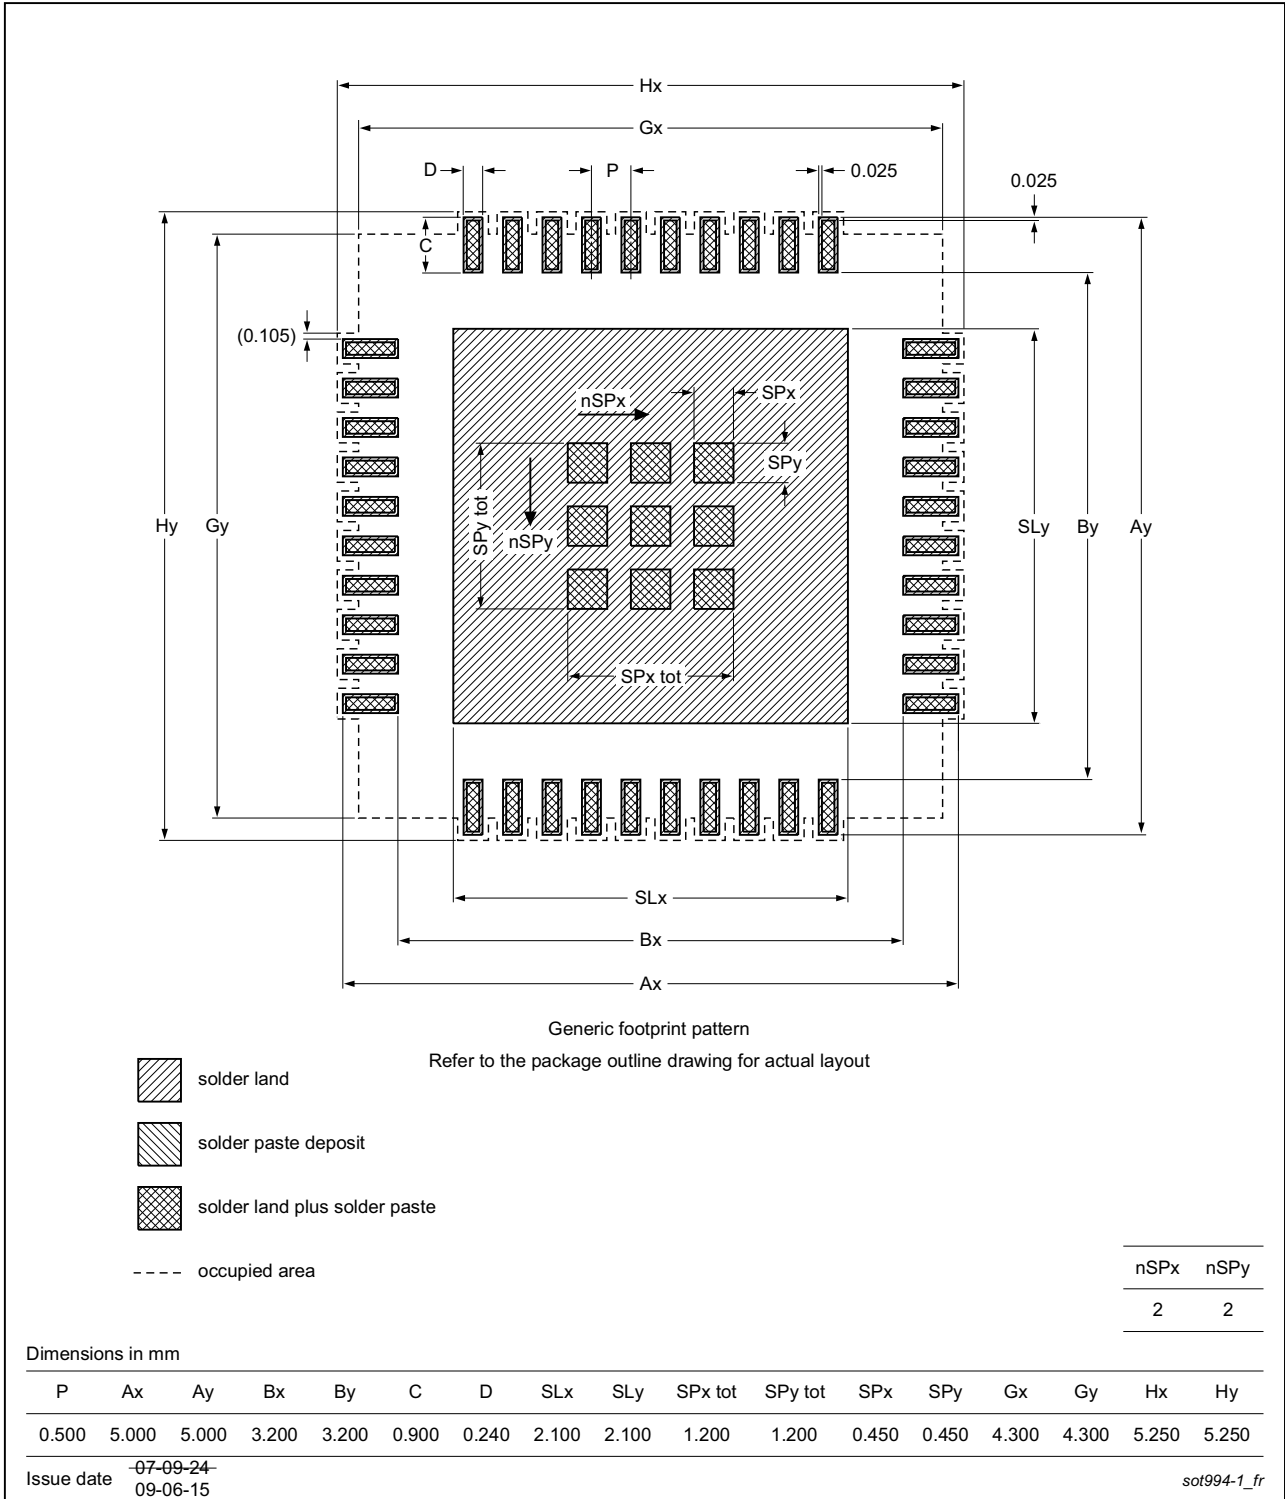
PCB footprint for SOT994-1 (HVQFN24); reflow soldering
